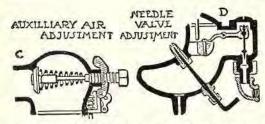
Showing principal parts of an air-valve type carburetor for adjustments.
